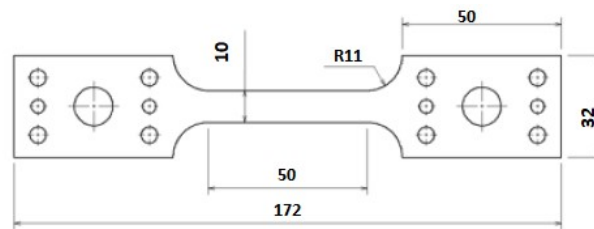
Dimensions of uniaxial tensile specimen (in mm)
